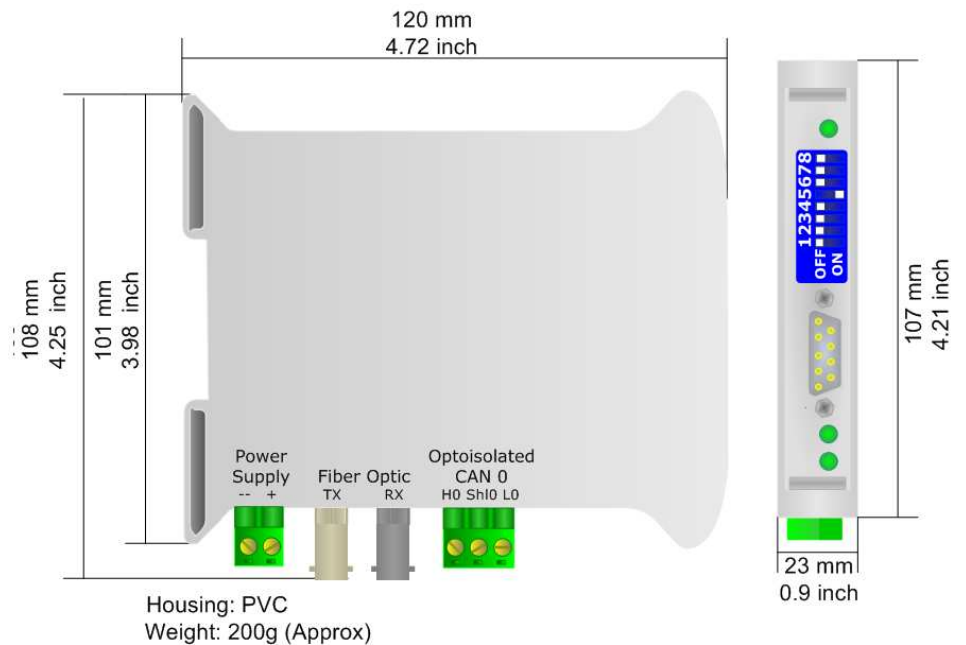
Mechanical Dimensions Scheme for HD67XXXFSX
